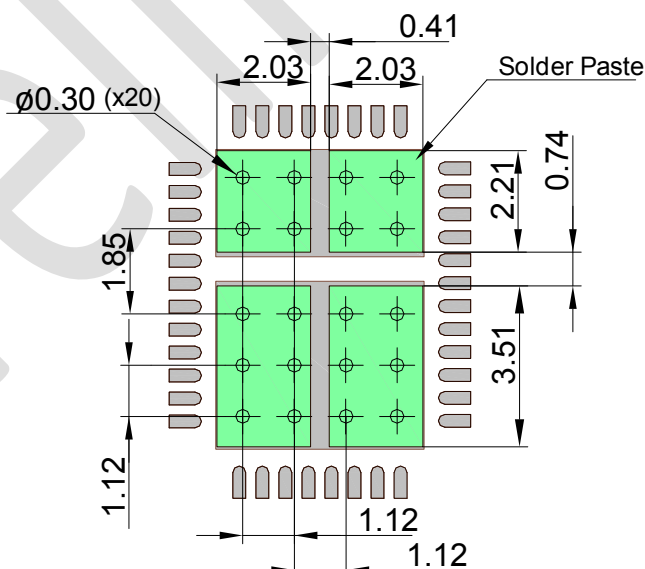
PD70222 Top layer Solder Paste and Vias Recommended PCB Layout for Thermal Pad Array (mm)
